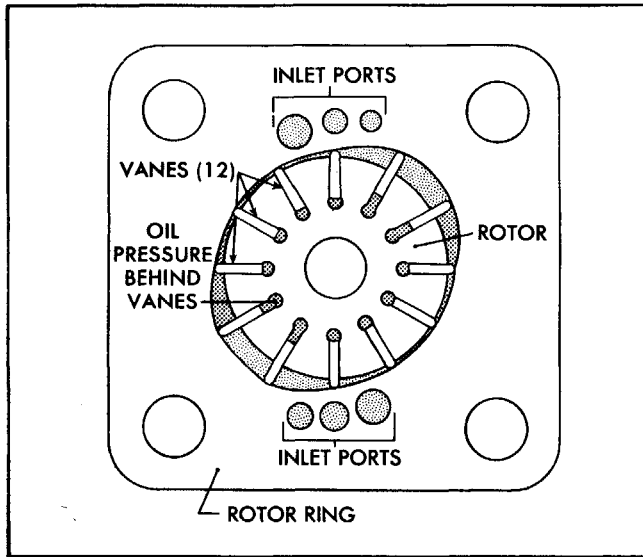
Oil Flow in Rotor and Vanes in Rotor Ring
